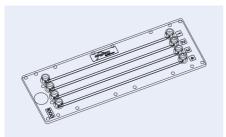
Schematic drawing of chip Fluidic 138 to be equipped with double-sided adhesive tape
